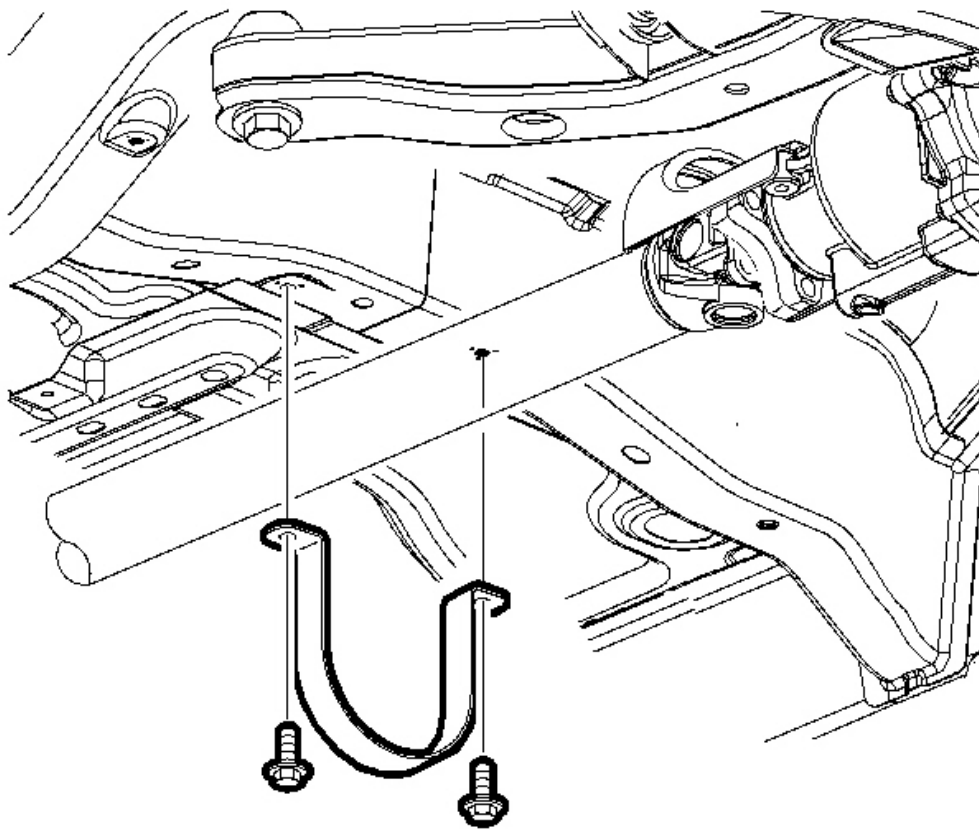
Removing/Installing Propeller Shaft Underbody Guard Loop Bolts
